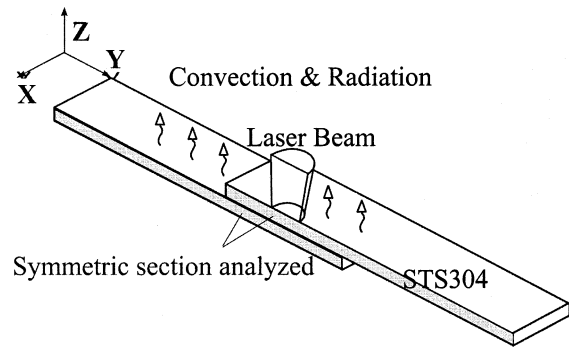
Symmetric physical model for thermal analysis of laser spot welding.
